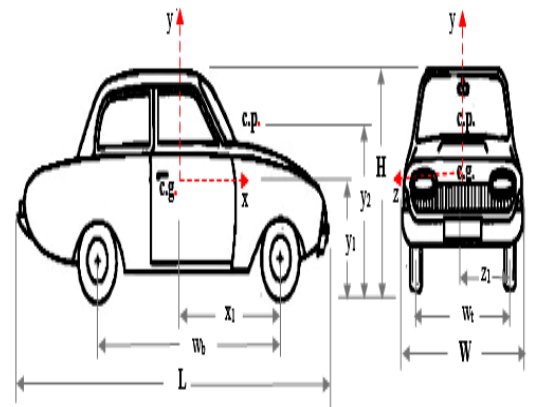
3 Vehicle Drawing and Dimensioning [37]
